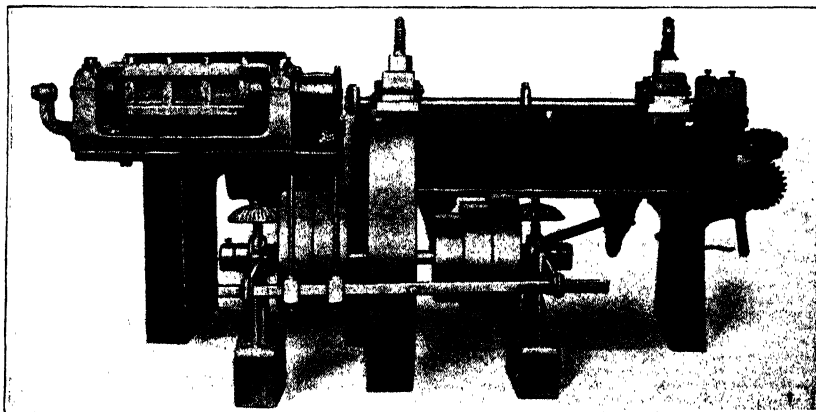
MACHINE FOR CUTTING HEAVY WIRE—G. CROSSLEY.
